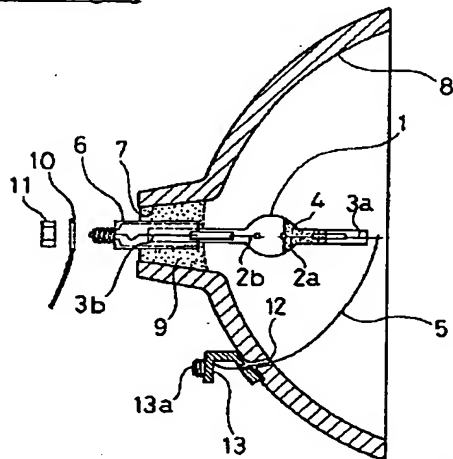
It is the sectional view showing other examples of a configuration of conventional short arc metal halide lamp equipment.
